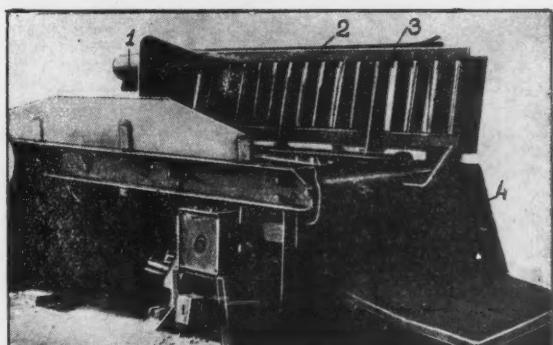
Turning mechanism for sheet packs; 1) cradle; 2) collecting roller tables ; 3) toothed sector ; 4) stand; 5) belt conveyor; 6) brakes.
